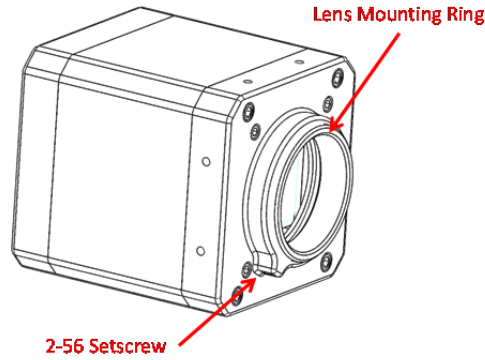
Location of Setscrew to Loosen Lens Mounting Ring for Focus Adjustments
